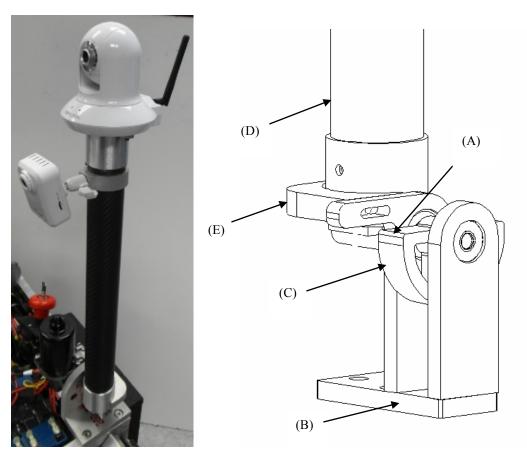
(Left) Camera mast mounted the rover, (Right) Spring loaded mast design
